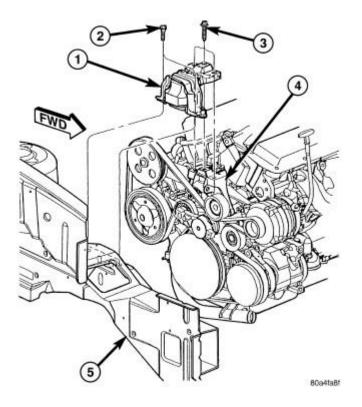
Right Engine Mount Courtesy of CHRYSLER LLC
